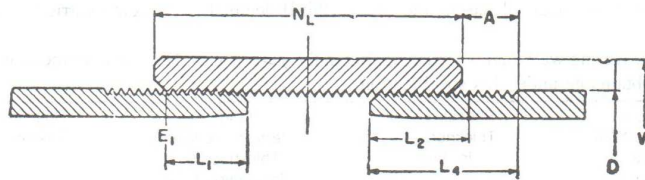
Dimensions of Hand Tight Assembly for Use with Table X3.1
